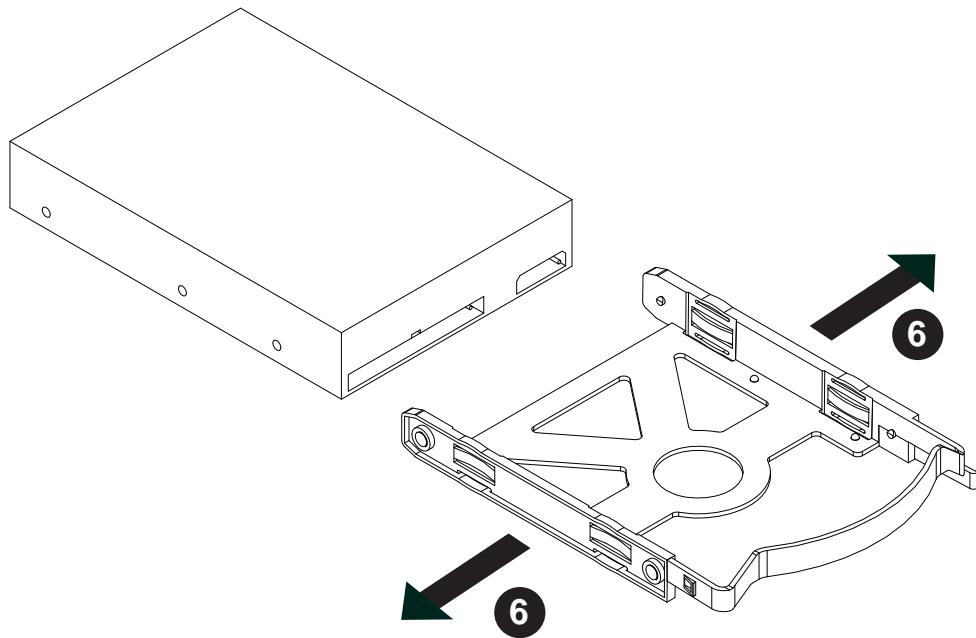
Removing a Hard Drive Carrier from the Hard Drive Cage
